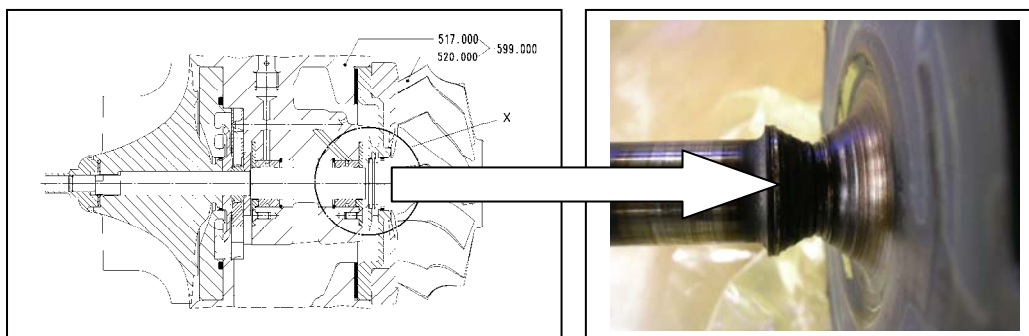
shaft grinding on the turbine shaft on a NR12/S turbocharger
